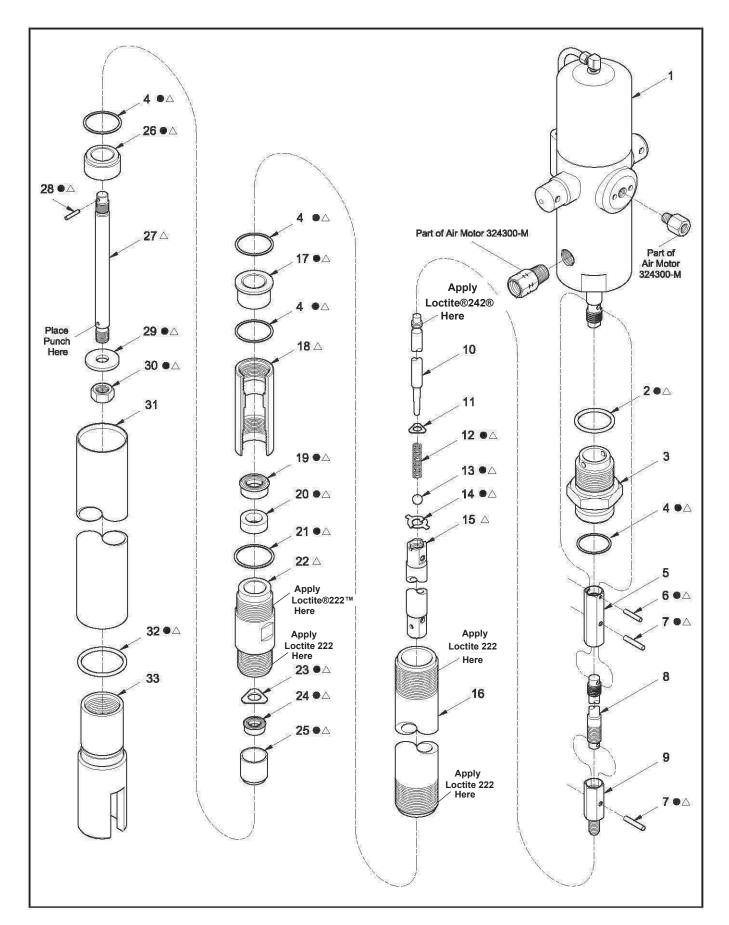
High-Pressure Pump Models 331380 Series - Exploded View
